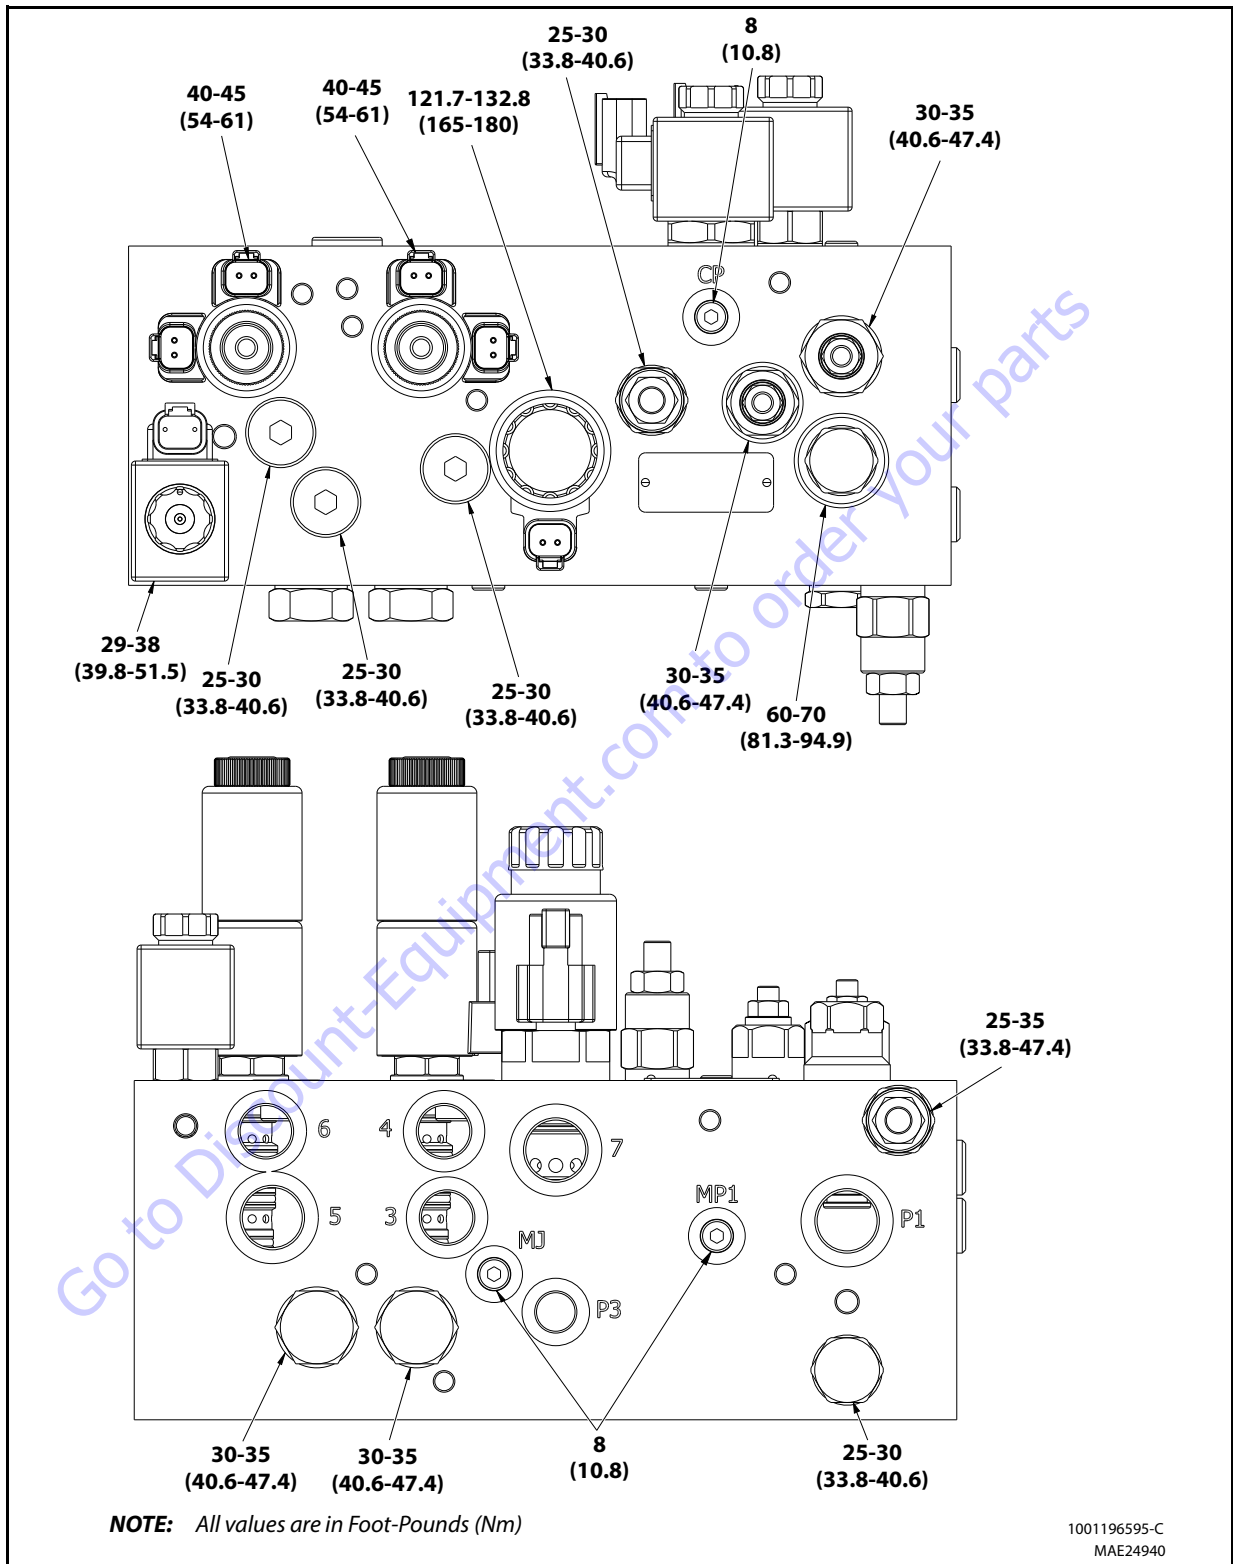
Main Control Valve Torque Values - Sheet 1 of 2
